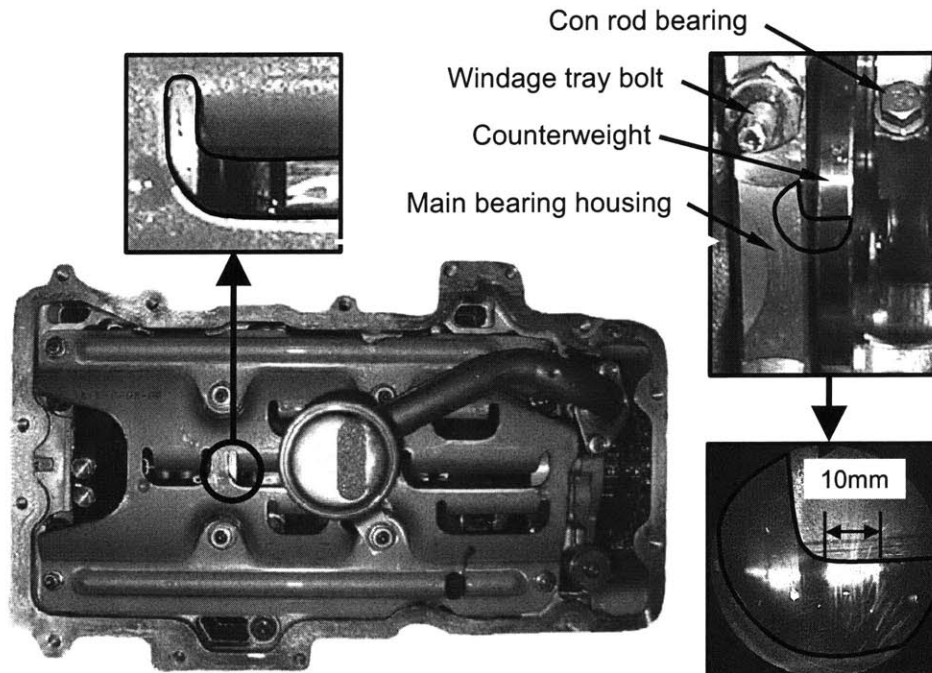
A crankshaft counterweight as seen through the windage tray
